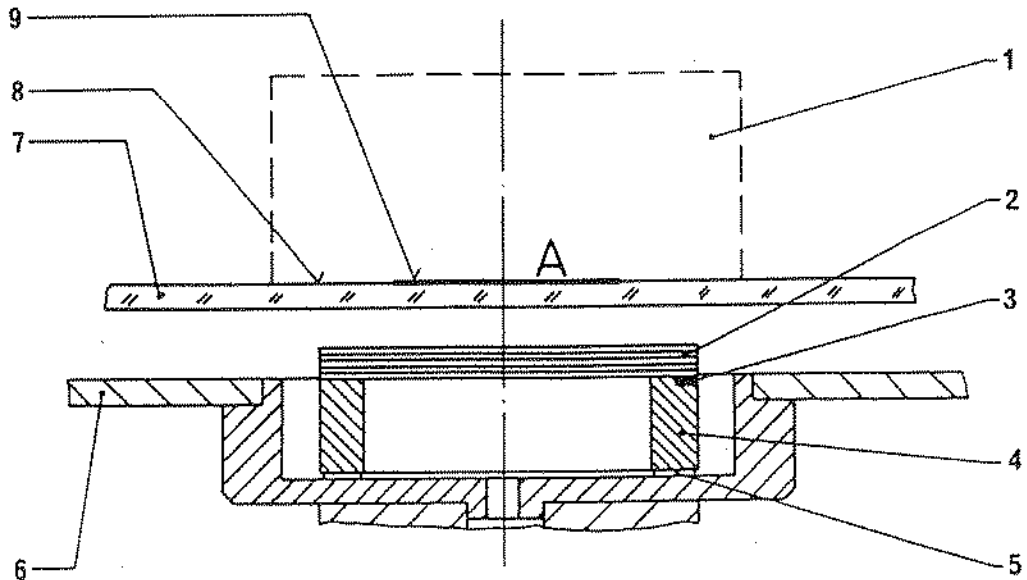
Installation Drawing for Additional Group, Type 148-332
